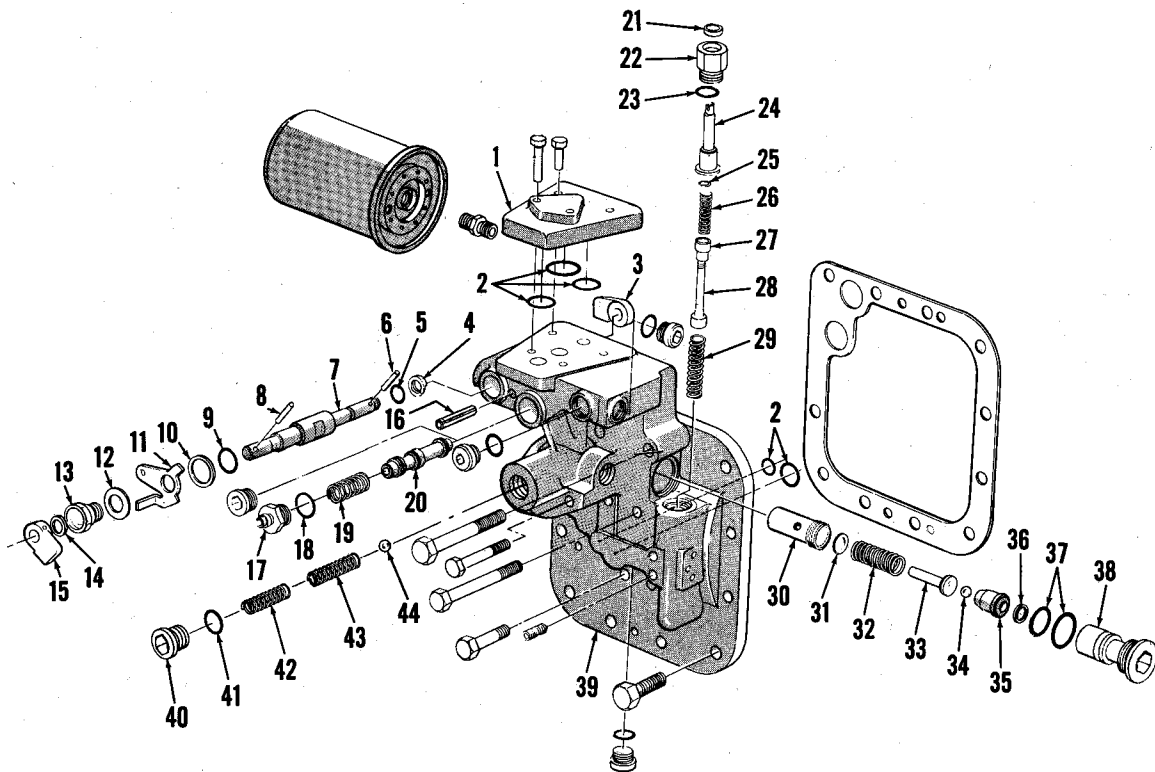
Exploded view of pump adapter plate and valve assembly. On models equipped with remote control valves, valve units are mounted between adapter plate and manifold (1). Adapter plate (39) is serviced as complete plate and valve assembly only; all other parts are available separately. Flow control valve spool (20) is select fit to bore size in adapter plate. See Fig. 217 for exploded view of pressure relief system used on Models TW-10, TW-20 and TW-30.
